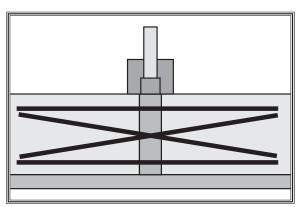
Straightedge positions for checking infeed/outfeed parallelism.
